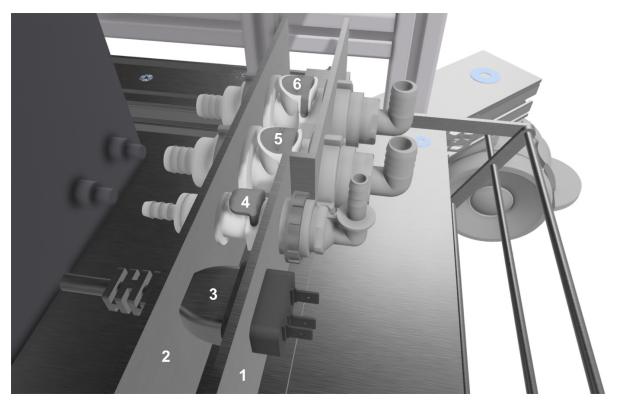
Concept design of the multi-connector hub providing easy attachment and detachment of devices needed for stationary ECMO
